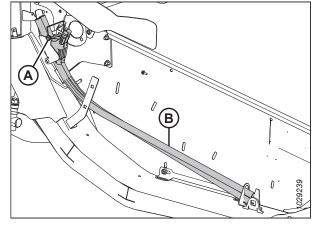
Divider Rods in Storage Location at Right Header Endsheet
